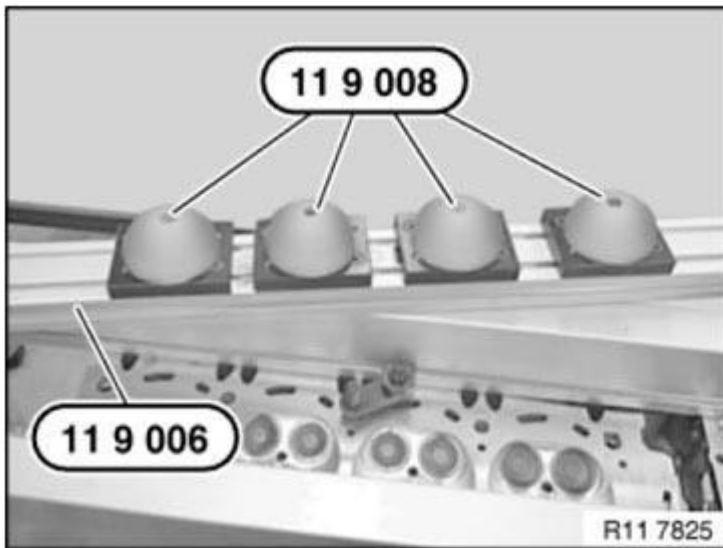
Preparing Special Tool 11 9 008 On Special Tool 11 9 006
